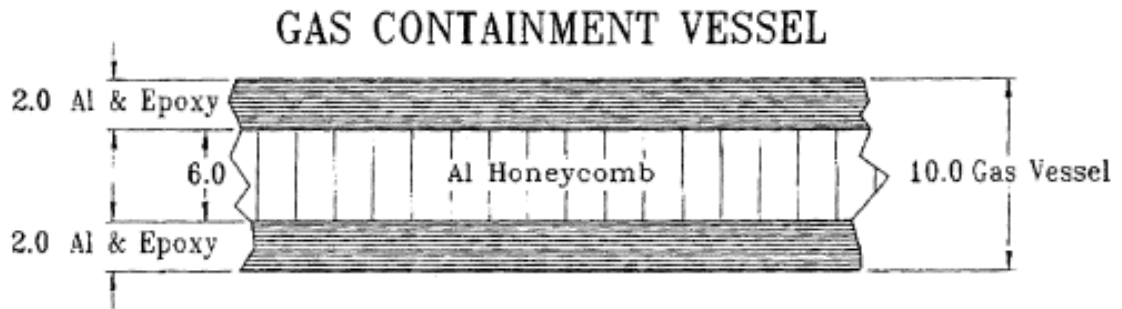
Aluminum gas containment vessel. Dimensional units are in millimeters.
